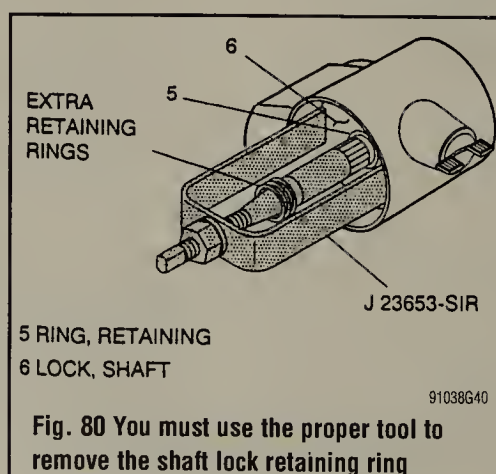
You must use the proper tool to remove the shaft lock retaining ring
